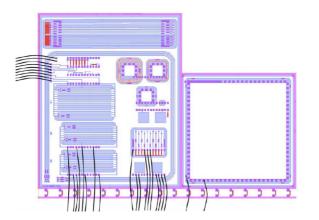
Wire-bond schema (left) used for automatic tests of the QA silicon pieces on PCB board (right).
